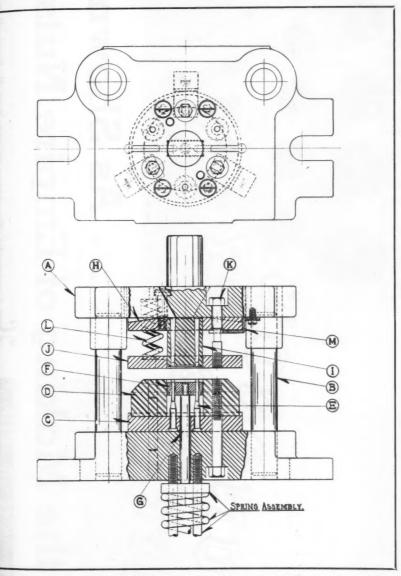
Typical construction of inverted compound die for producing the blanks shown in Fig. 3.
